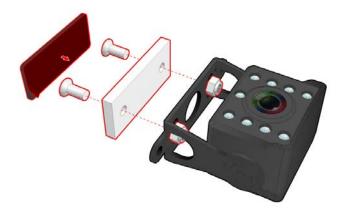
Attaching magnets and 3M tape to front & rear cameras
